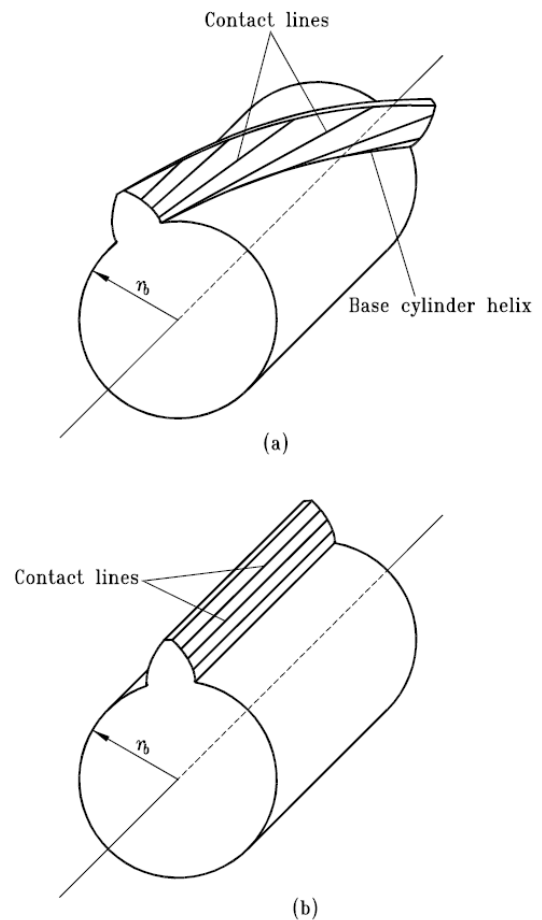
Contact lines on tooth surfaces of a helical gear (a) and a spur gear (b)
